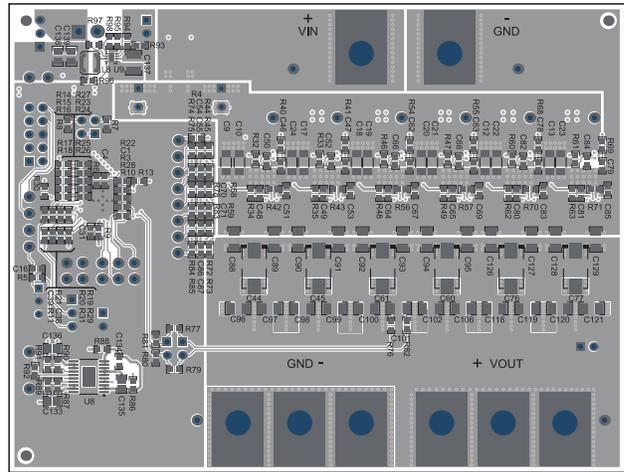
Bottom Layer Assembly Drawing (Bottom View)
